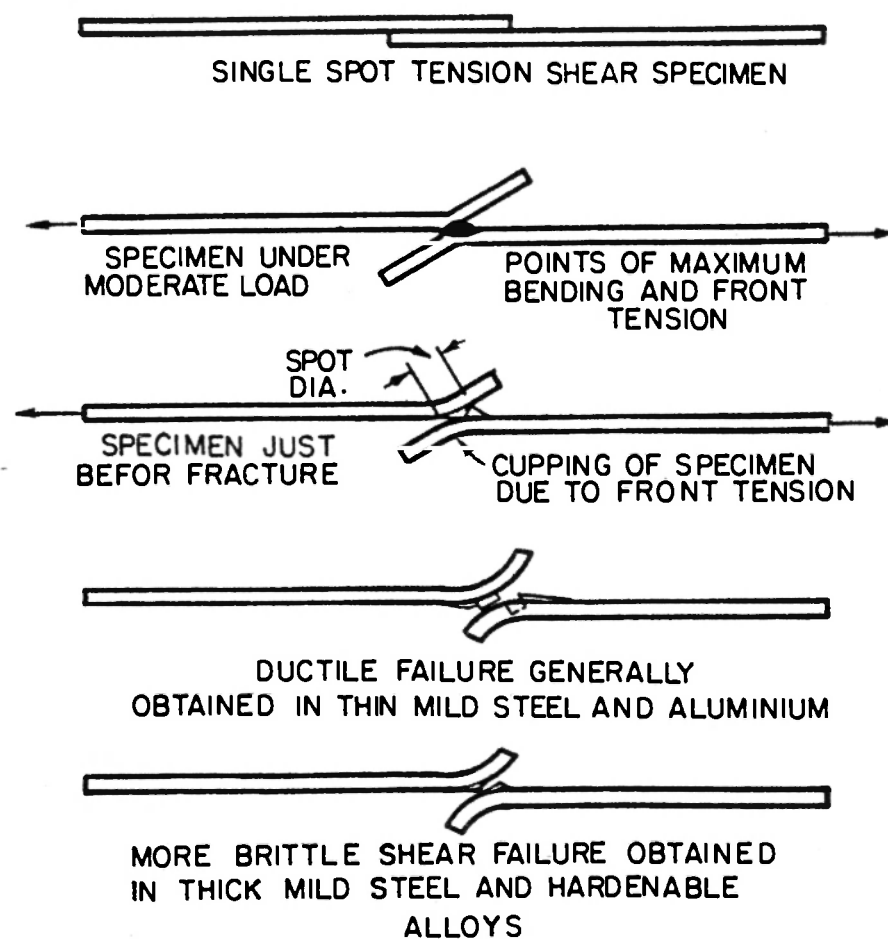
Behaviour of a single spot tensile-shear specimen during testing (Ref. 5).
